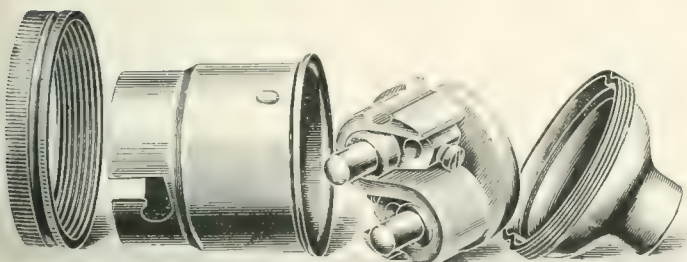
Parts of Double Contact Lamp Holder, made by the General Electric Co.
